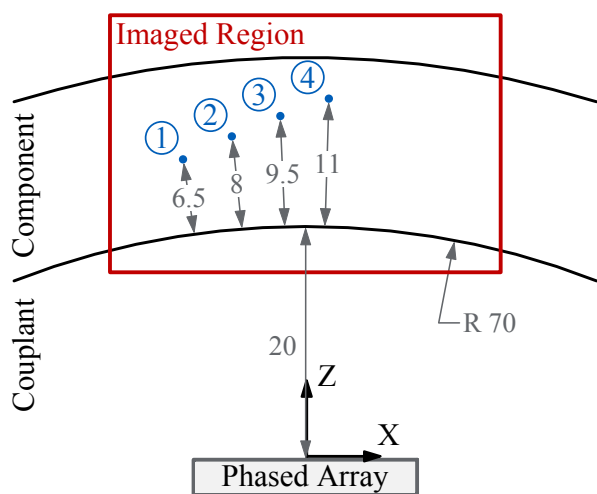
Inspection configuration of half-pipe specimen with side-drilled holes (dimensions in mm).
